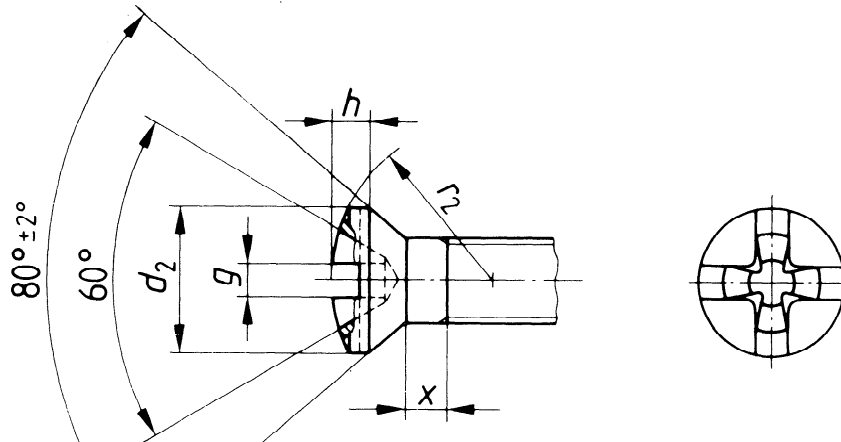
Screw head with combined cruciate-slot and cross-recessed drive connection
